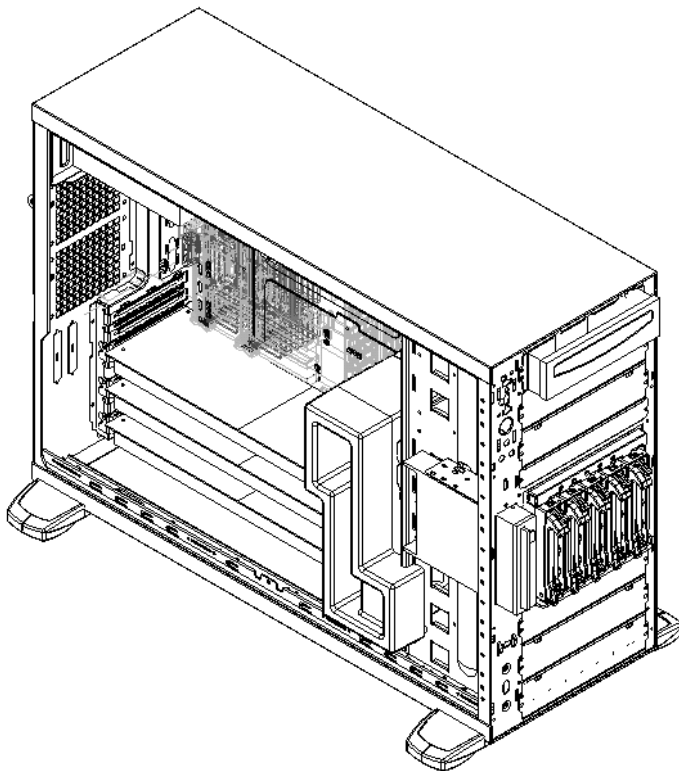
Front Isometric View, Open Access Cover and Bezels Removed
